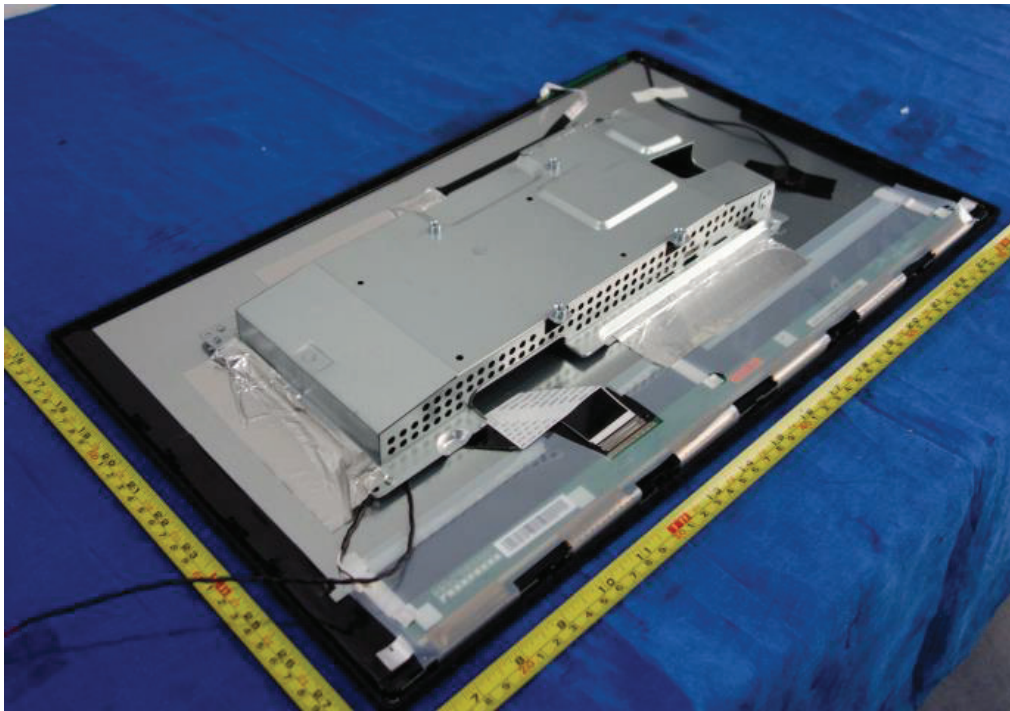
Metal enclosure type B with power board 715G7300 and main board 715G9494
